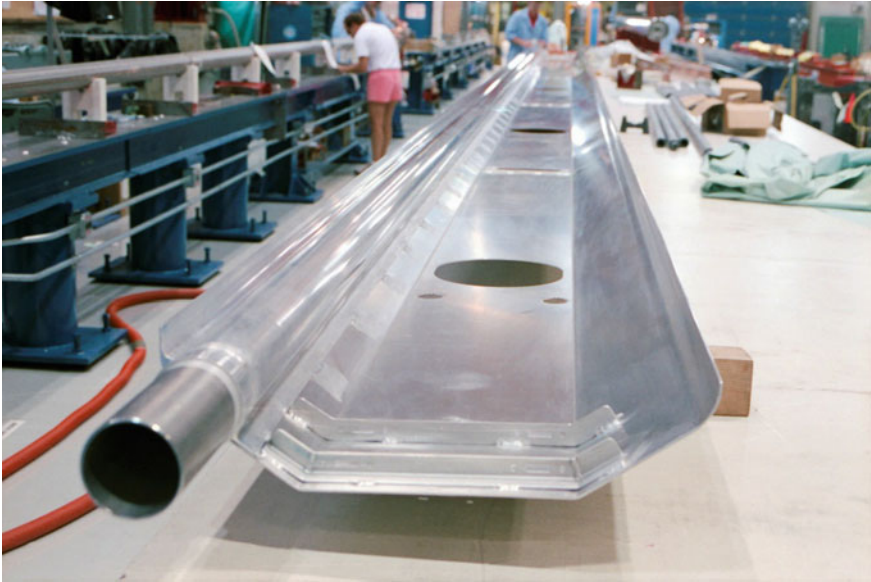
Lower half of the 20 K thermal shield assembly
